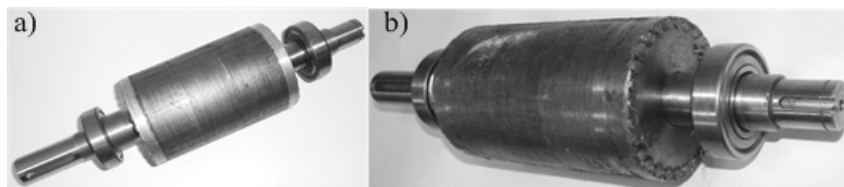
LSPMSM rotor with cage a) aluminium, b) copper
